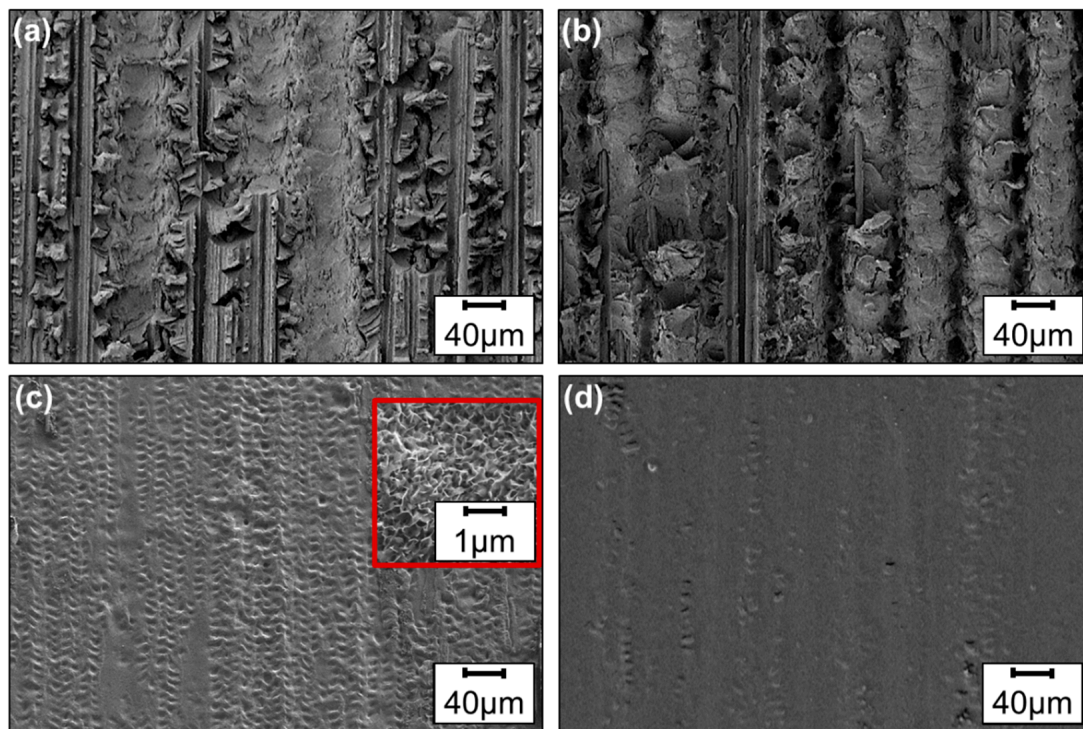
SEM images of fracture surfaces of unaged hybrid SLS specimens: metal side (green inset: laser-structured surface for comparison) on the left and CFRP side on the right. (a) R1 metal fracture surface; (b) R1 CFRP fracture surface; (c) R18 metal fracture surface; and (d) R18 CFRP fracture surface (square: missing polymer matrix revealing the carbon fibers) specimens.
